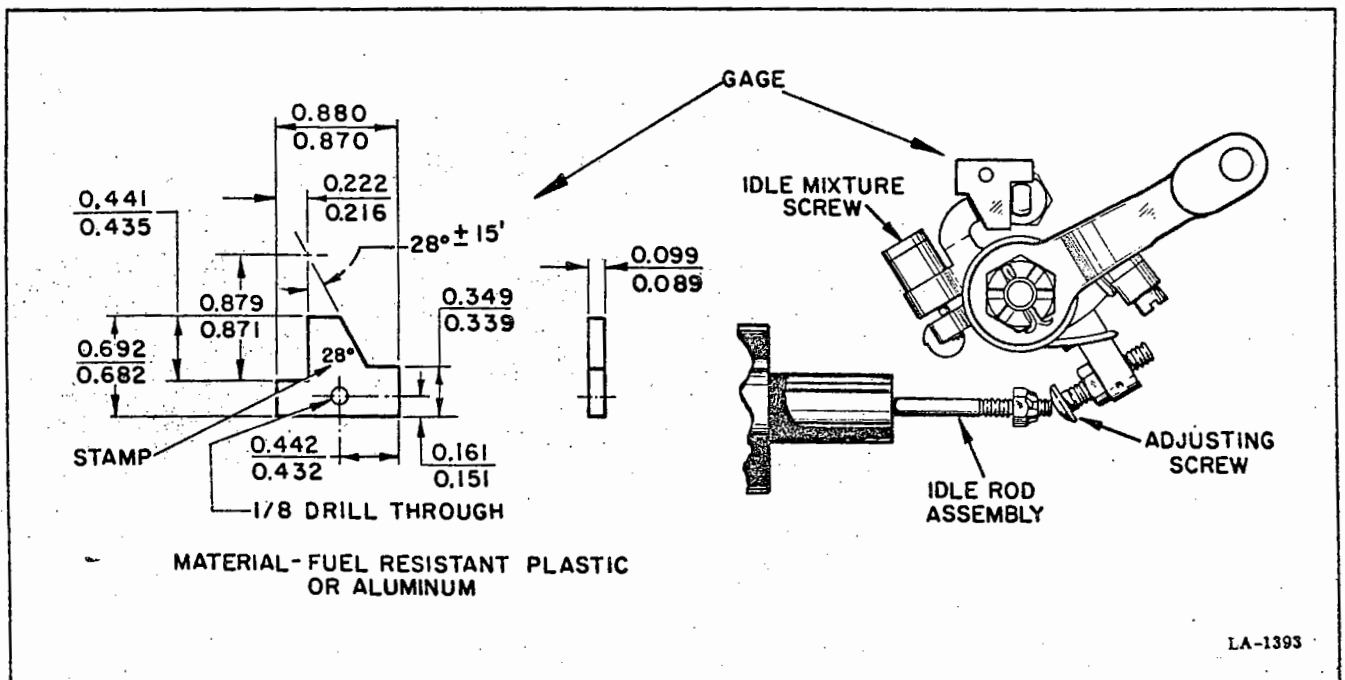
Setting Enrichment Valve Actuating Screw With T25941 Gage
